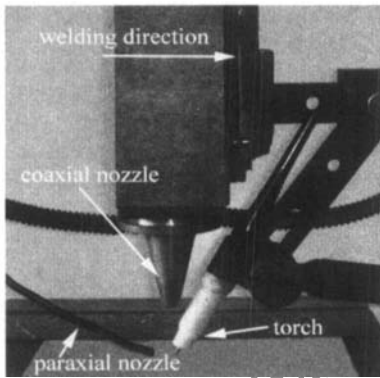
Schematic setup of CO<sub>2</sub> laser-TIG hybrid welding
